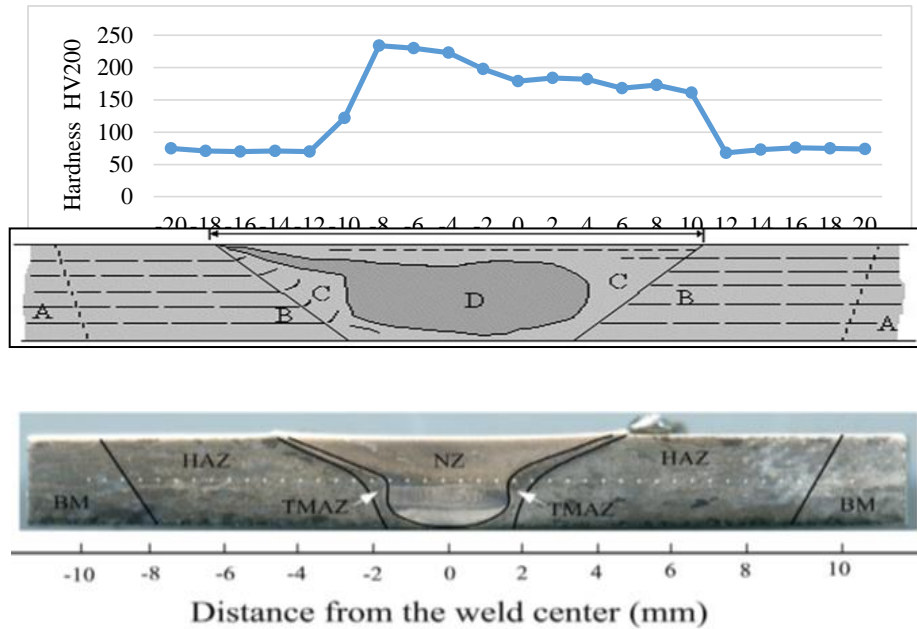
Microhardness profiles along center lines of the weld cross section, appearance of an onion ring in a cross-section and optical macrostructure of an AA5754 aluminum alloy welded by FSW
